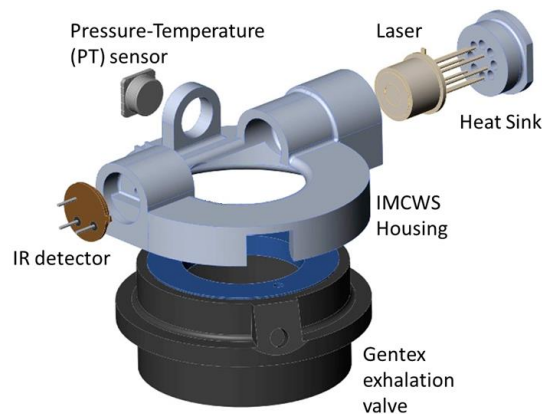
Exploded View Diagram Showing Configuration of Sensor Elements, Structural Housing, and Mask Exhalation Valve
